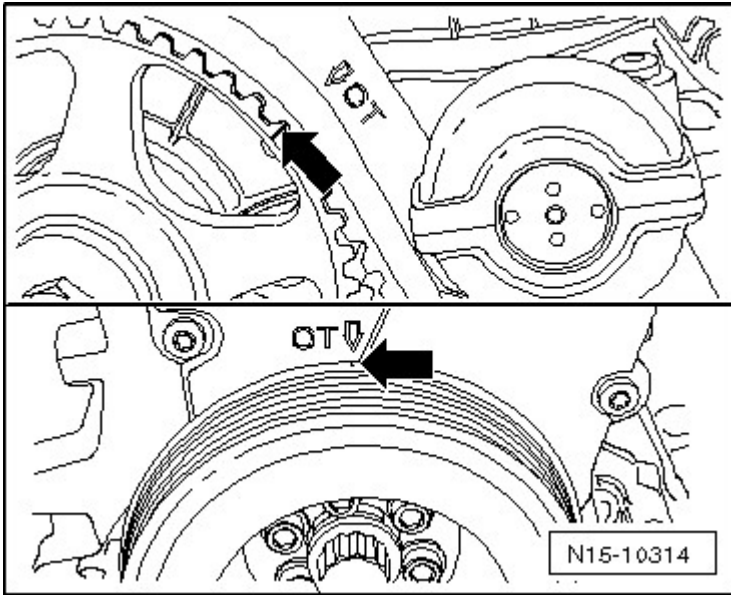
Bringing Camshaft Gear To Marking For TDC Cylinder 1
